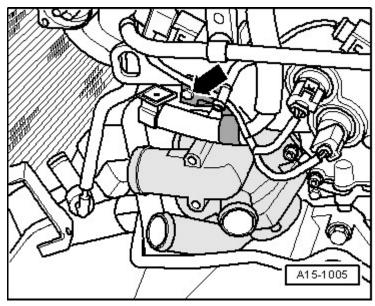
Identifying Wiring Harness Bracket & Bolt Courtesy of AUDI OF AMERICA, LLC
